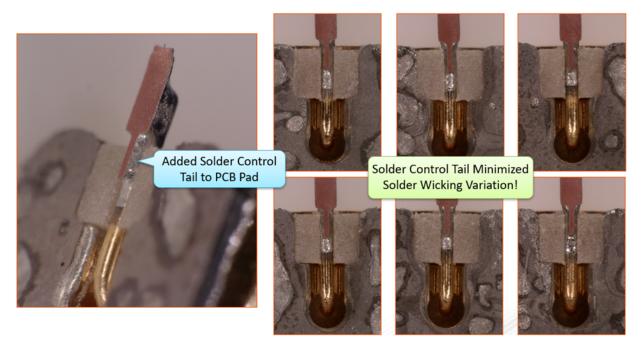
We adjusted the PCB launch by adding a solder control tail to the PCB pad, which resulted in much more consistent solder wicking.
